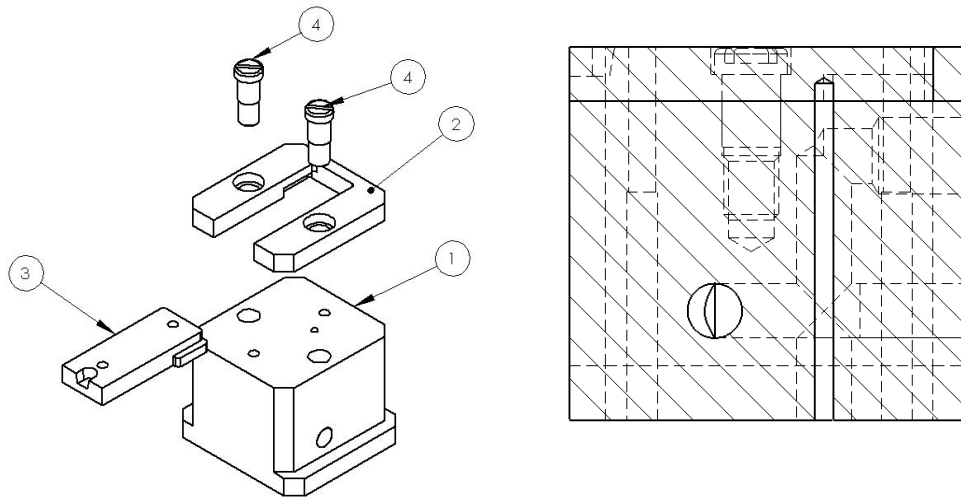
Exploded view of the moulding block base (1), fixing ring (2), moulding insert (3), fixing screws (4) and a cross-section showing the hole for the thermocouple
